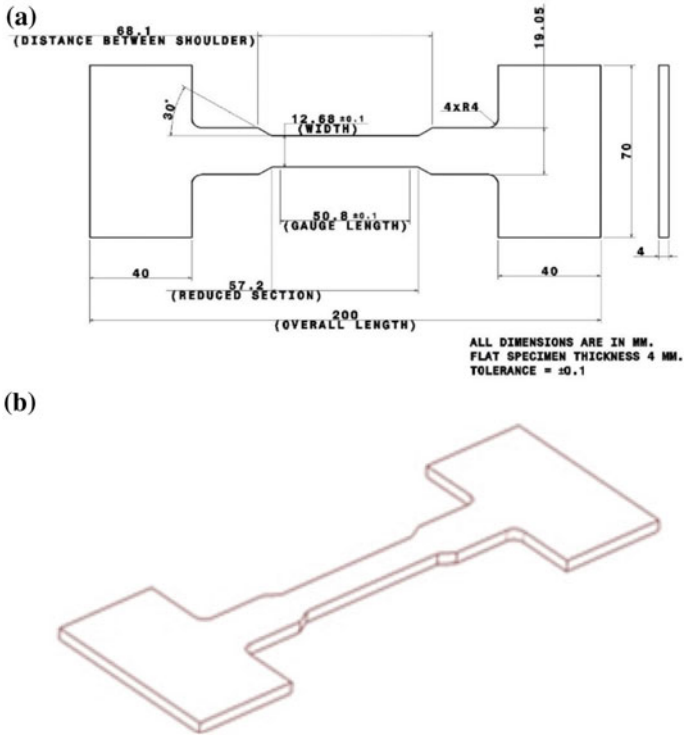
Flat plate tensile specimen drawing: a 2D drawing and b isometric view
